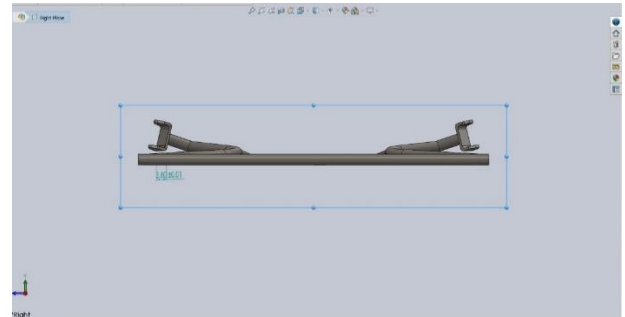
RIGHT SIDE VIEW OF CHASSIS
